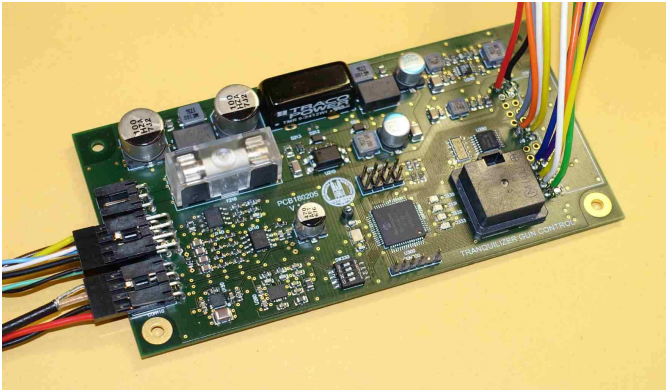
Control board for the tranquilizer gun remote control unit.
